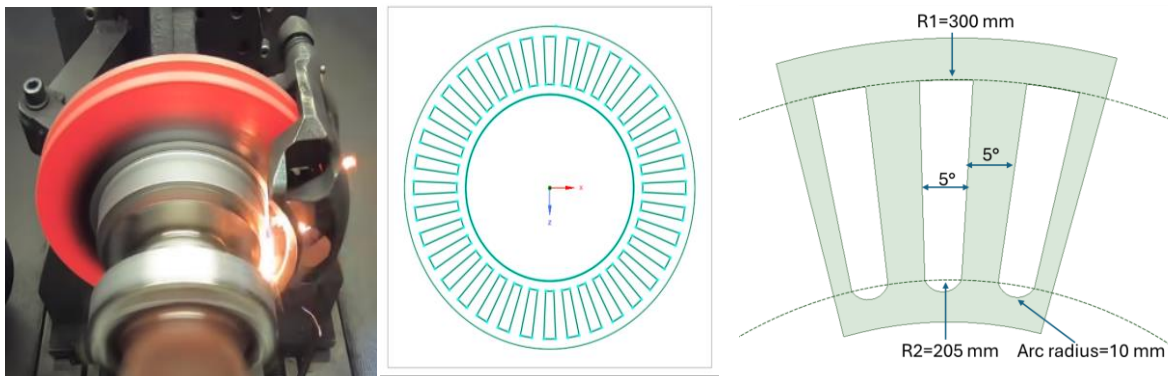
Brake disc (a): experiment (b): whole view (c) part of brake disc
